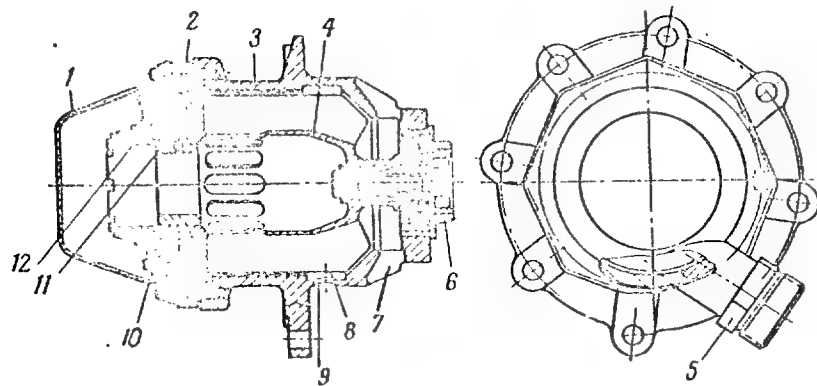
CENTRIFUGAL BREATHING DEVICE
